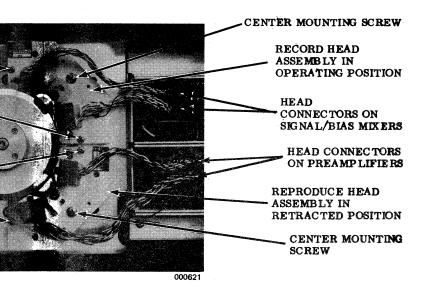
Preamplifiers #1 Unplugged for Head Assembly Removal
